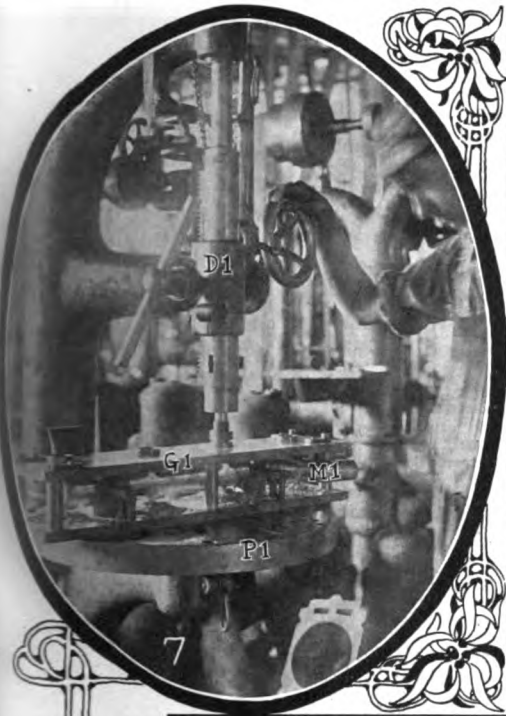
In the Elmore Plant, presenting a drill press D1 using a fixture with a jig plate G1 on the platen P1 finishing a manifold M1 which under ordinary circumstances would be an extremely difficult piece to handle, but
